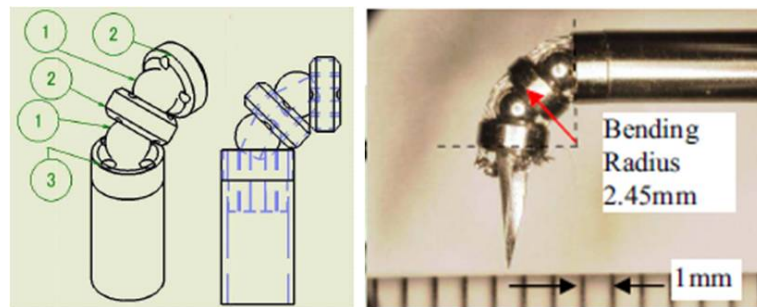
Miniature bending mechanism using ball joints (Fujie et. al.) [47]
